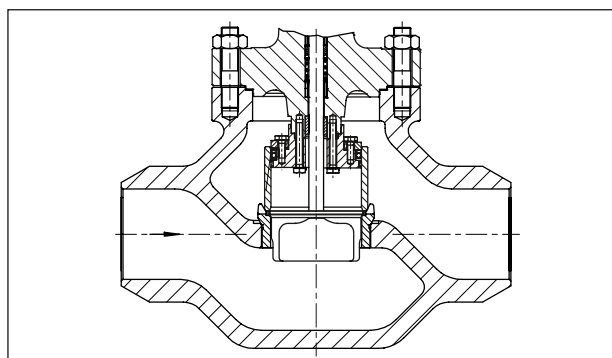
Type 3251/3251-AM Valve with welding ends and balanced plug
